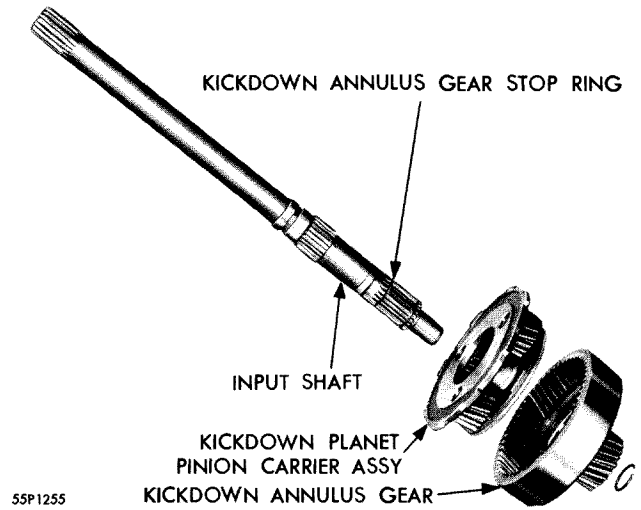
Input Shaft and Kickdown Planetary Gearshift—Disassembled
